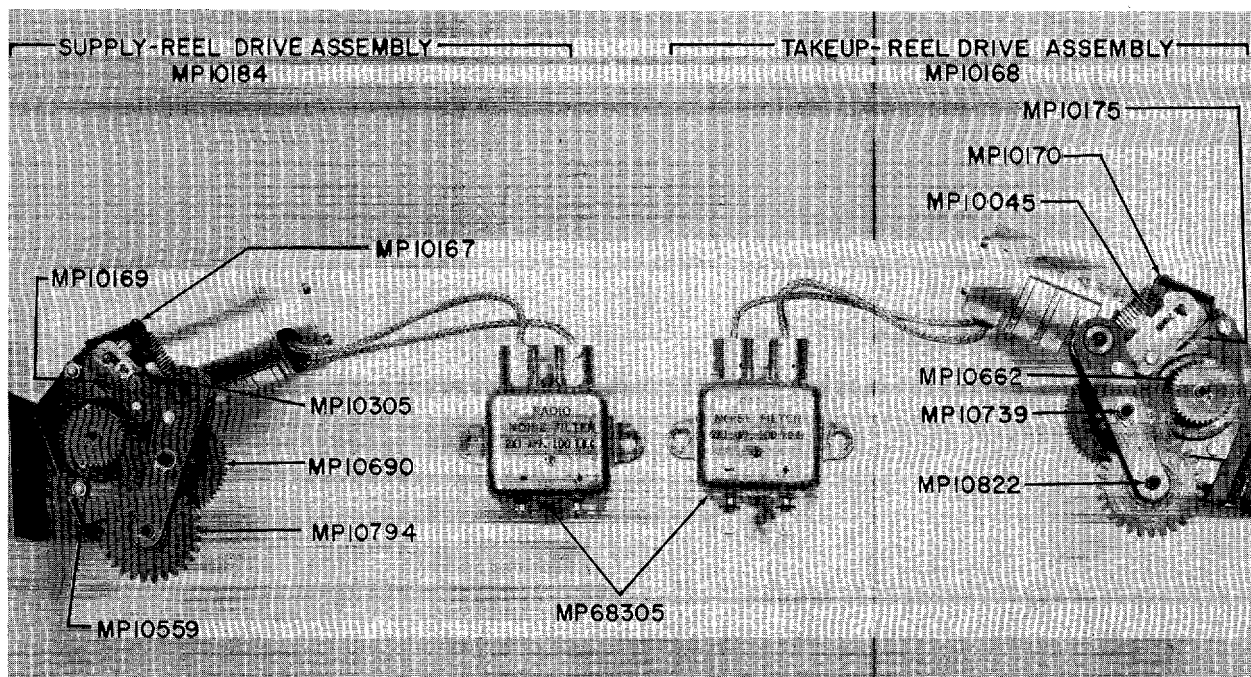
Reel-Drive Assemblies, Parts Callouts
